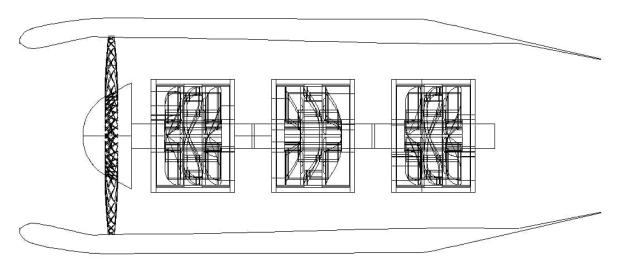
Cross-section of PAX 50 engine with 3-rotor diesel core engine.
